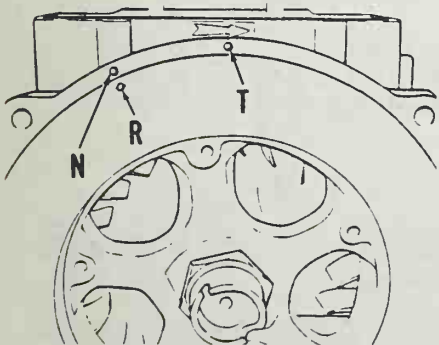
Fuel injection should occur when flywheel reference mark (R) is aligned with crankcase mark (N). The piston is at top dead center when flywheel mark (R) is aligned with crankcase mark (T).
